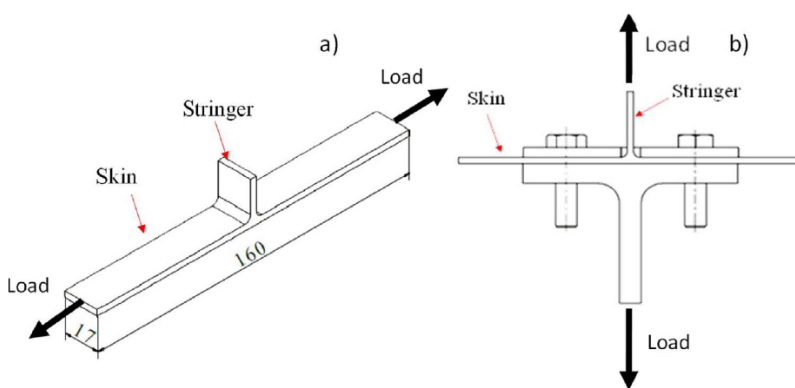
Schematic view of the specimens and setup for the: a) tensile and fatigue tests (dimensions in mm); b) pull-out test.
